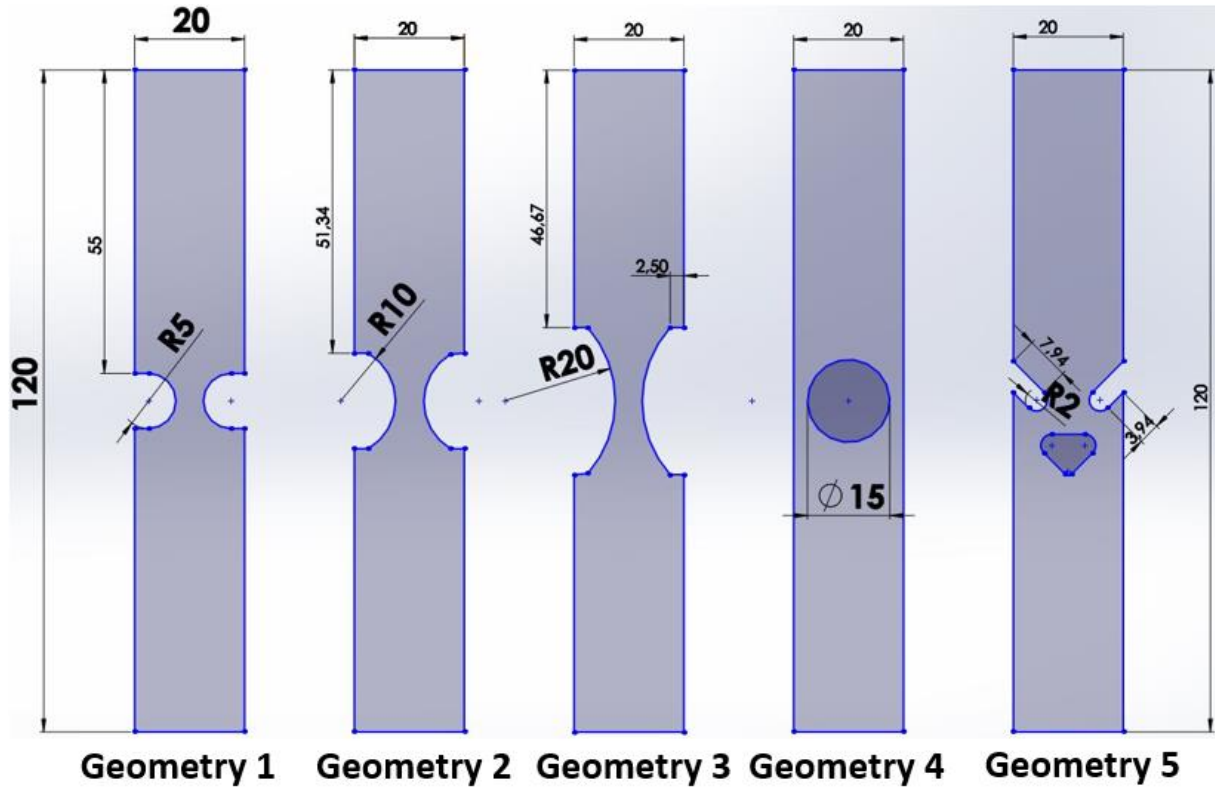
Specimen dimensions for tensile tests and fracture locus studies (unit: mm)
